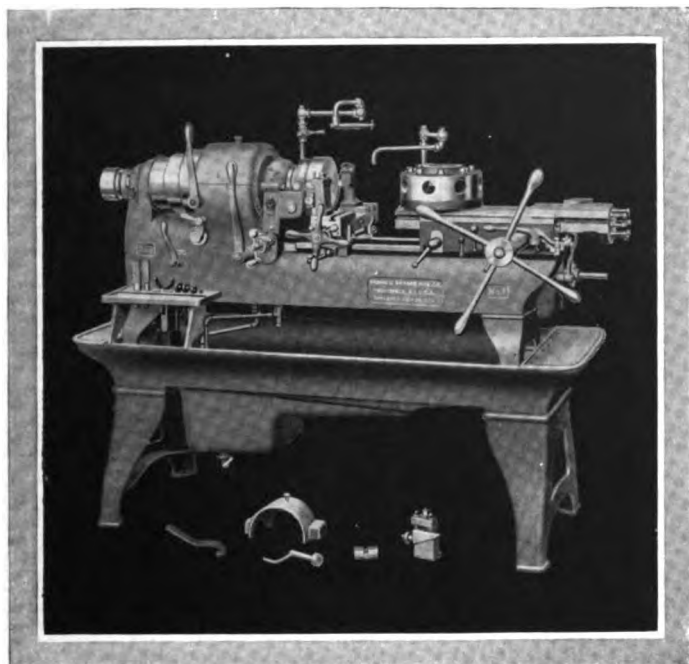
No. 4 Brown & Sharpe Automatic Screw Machine
